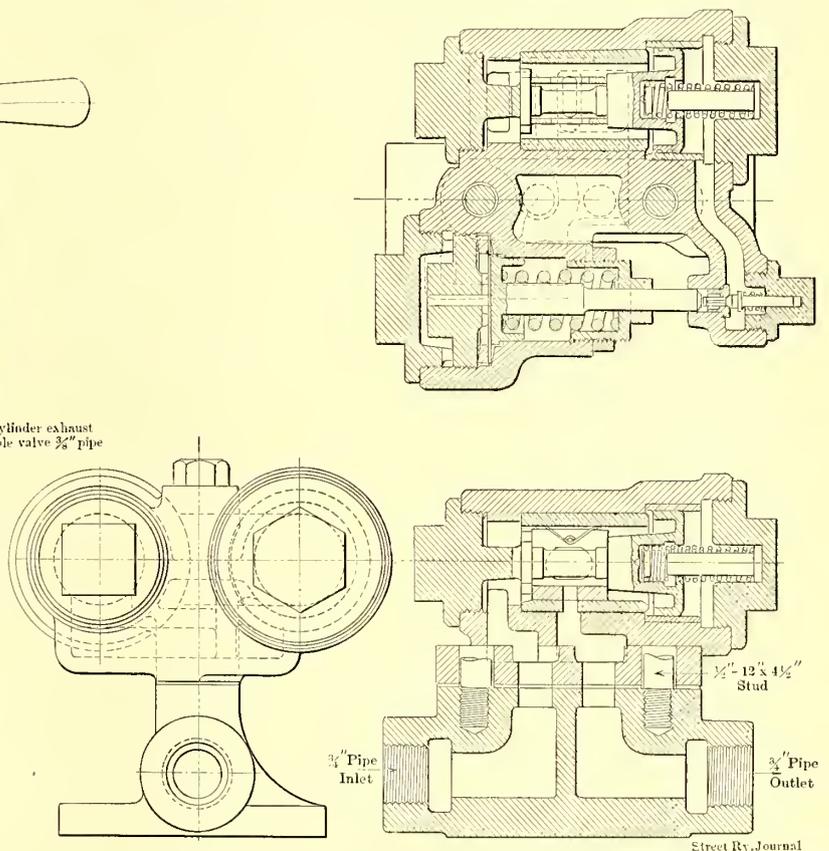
DETAILS OF REDUCING VALVE FOR SURFACE TRACTION AIR BRAKE SYSTEM
